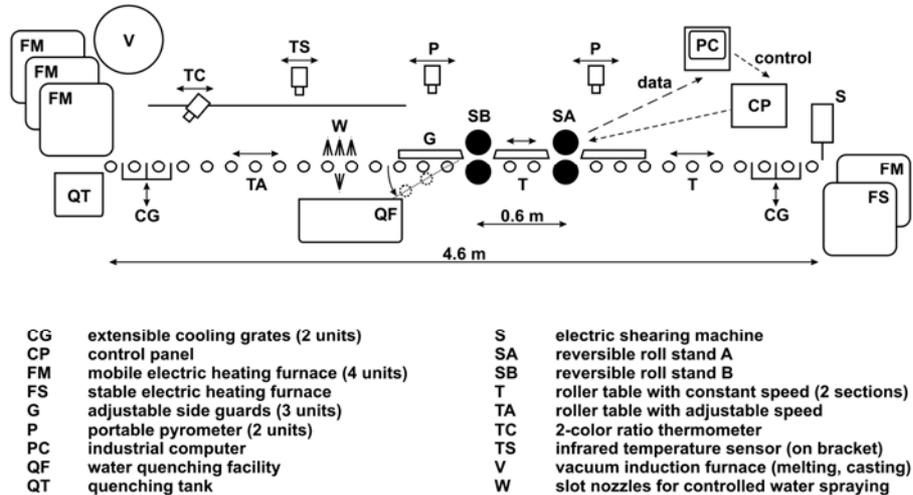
Layout of the laboratory two-stand hot rolling mill Tandem
